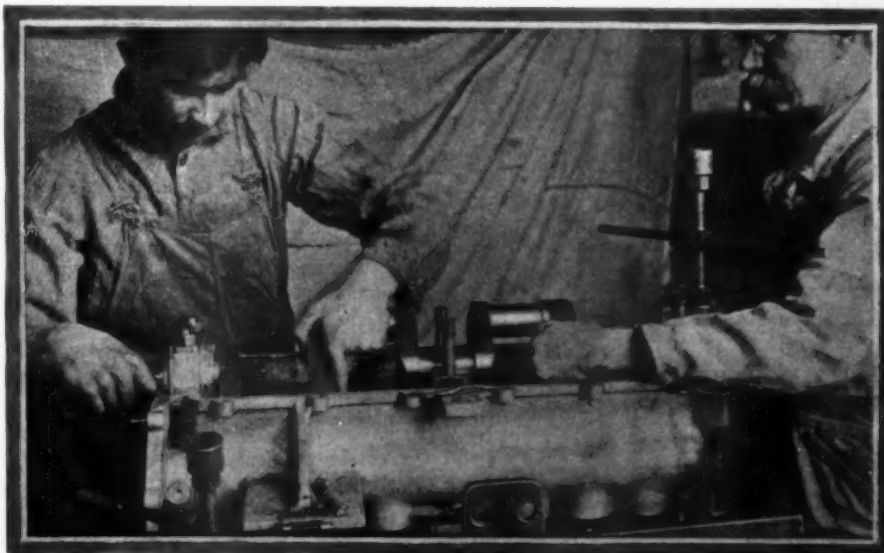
Depicting the method of rocking the crankshaft after it has been blued in the bearings to obtain the impression
